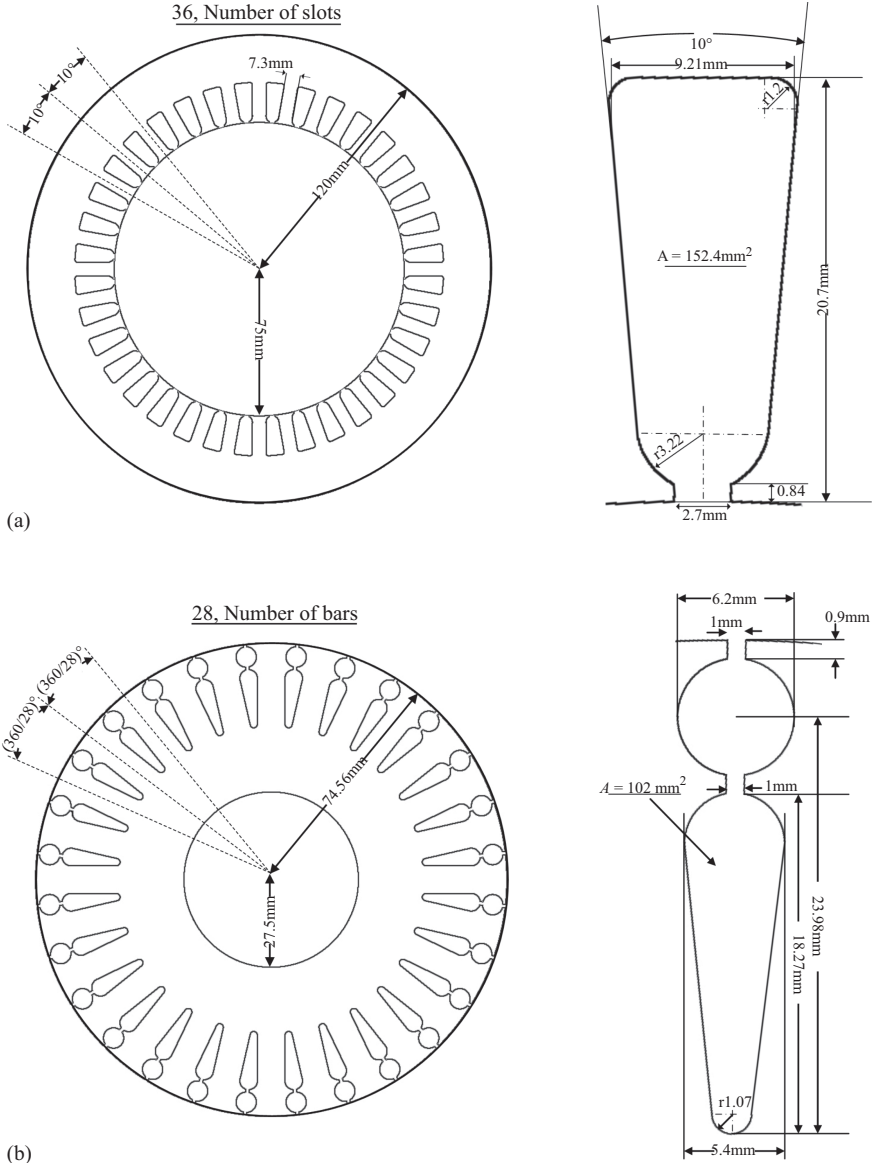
Induction motor dimensions (a) stator and (b) rotor
